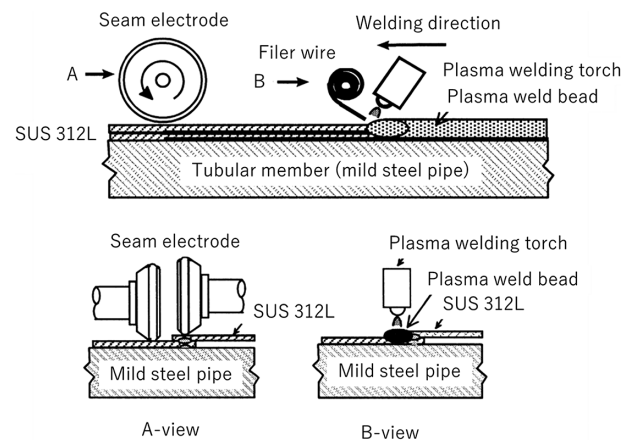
Schematic illustration of combined welding⁴⁾
